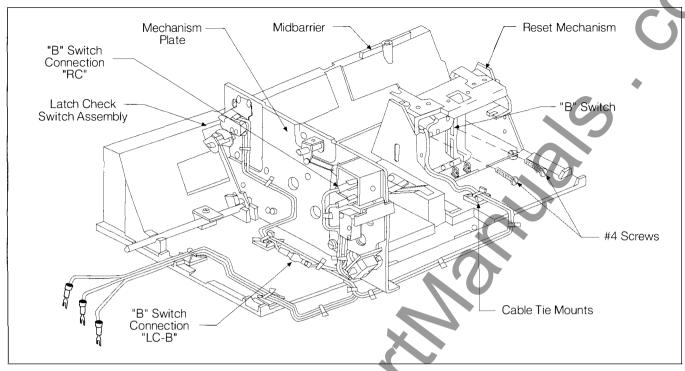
Mounting Of Remote Close Accessory and Wire Routing
